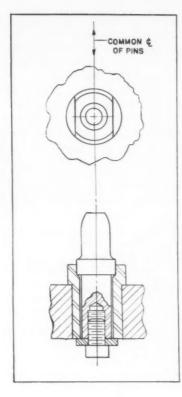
Floating locator pin for accurate positioning of work-pieces. Minimum pin-to-hole clearance and a large tolerance on the hole center-tocenter distance are possible.
